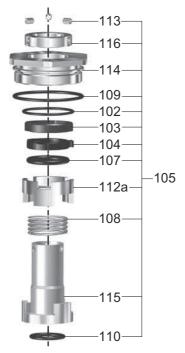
Shaft-seal parts for Ø28 and Ø36 shaft seals
